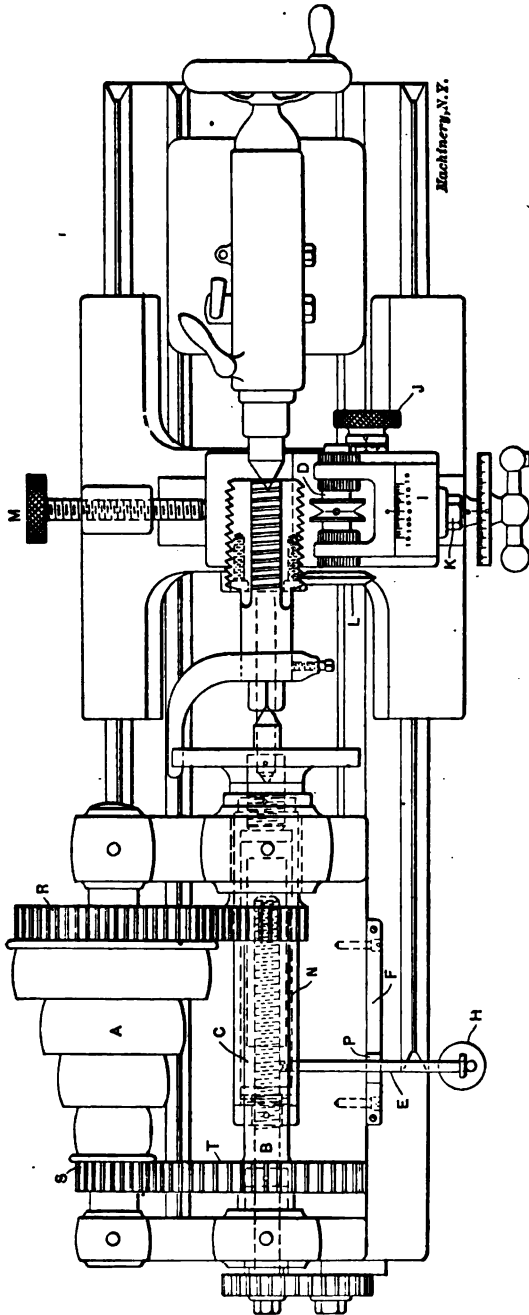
Lathe for Grinding Taps in the Angle of the Thread.
